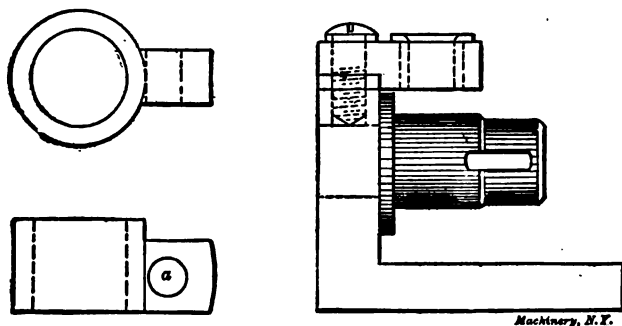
Piece to be Drilled, and Jig Used for this Work
